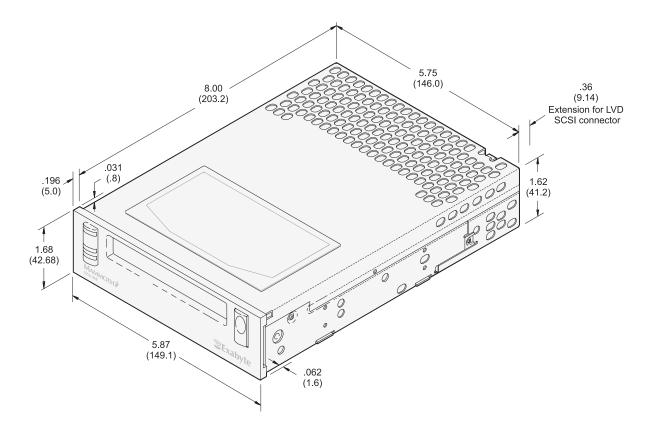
Dimensions of the tape drive in inches (and millimeters)
